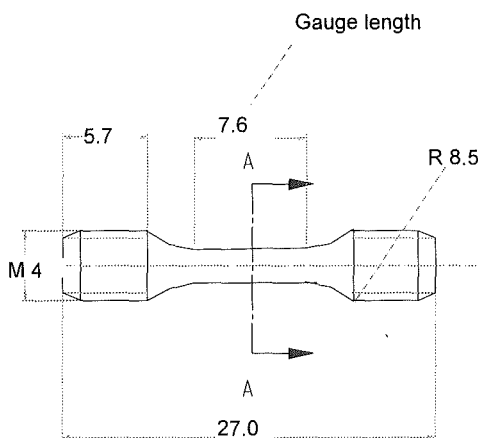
Suggested miniaturised push-pull fatigue specimen
